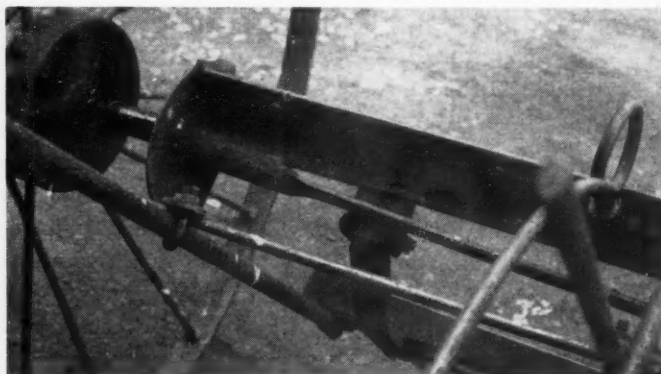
Welded hay rake axle designed by fusing together a 6-inch disc, a 2-inch angle and a flat bar.
